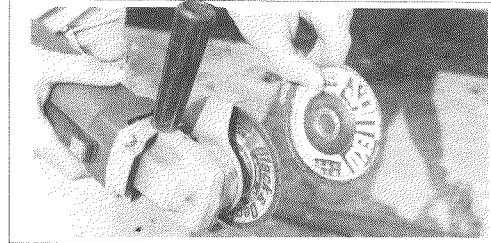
4 or 4 1/2 inch angle grinder. essential if you're going to do any welding. Use a thin blade for cutting, thicker for grinding.
